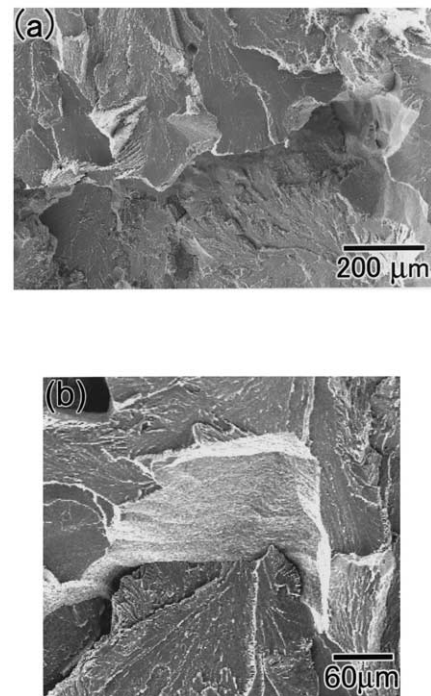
Fracture surface of SMC composite after bending test, (a) low magnification and (b) a sharp gap caused by intergranular fracture.
